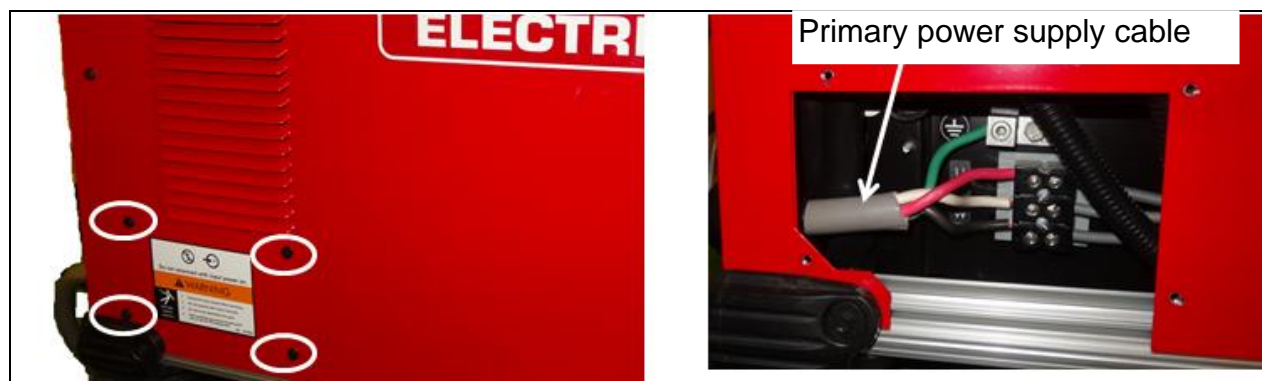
(c) Connection of welding power supply Power Wave R500
